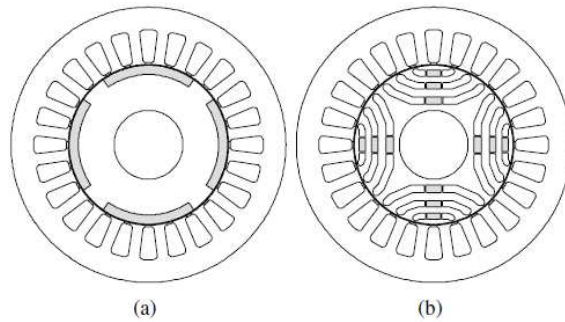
PM motors with (a) inset rotor and (b) IPM rotor [22]
